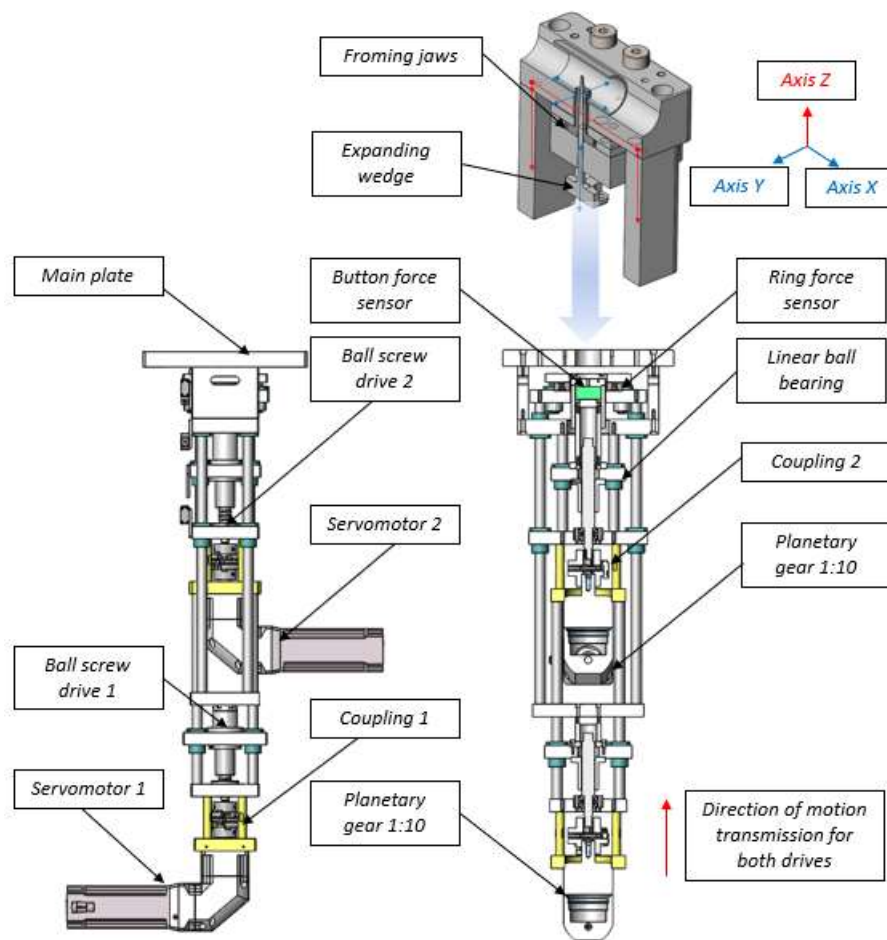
Stand view used in the production of the joint view of the tooling for making the joint
